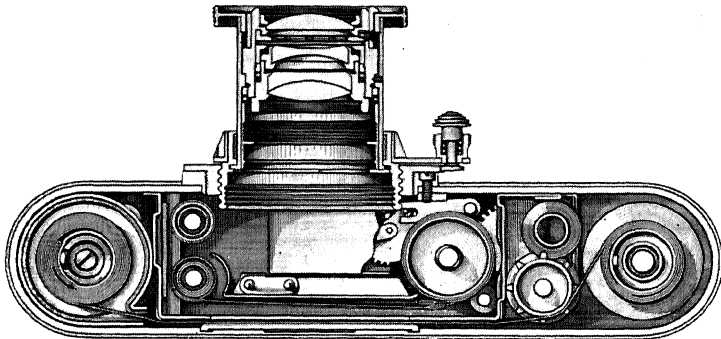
Top cross section view of the Leica showing position of the film, focal plane shutter, lens, and other working parts
